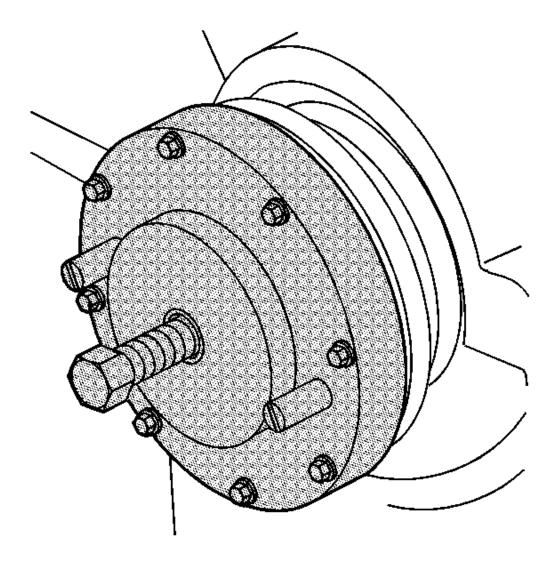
View Of J 43320 & Center Bolt Courtesy of GENERAL MOTORS CORP.
